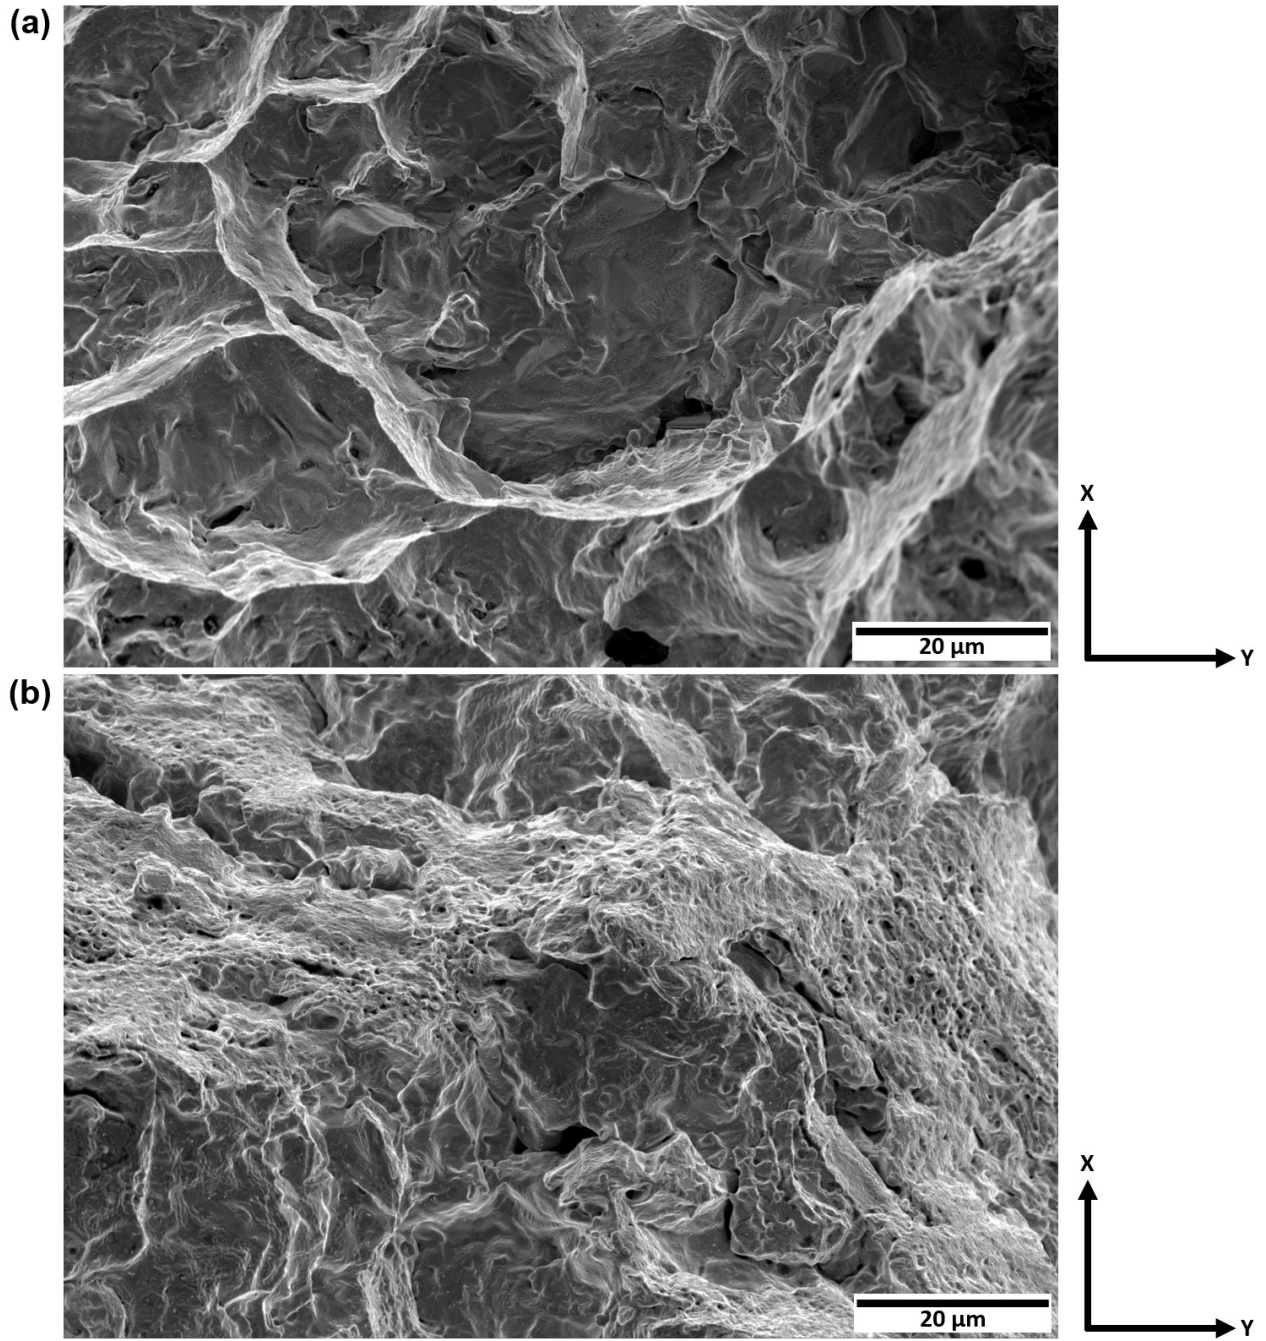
Fracture surfaces of (a) wrought CrCoNi and (b) AM CrCoNi following creep rupture at 1023 K and 130 MPa.
